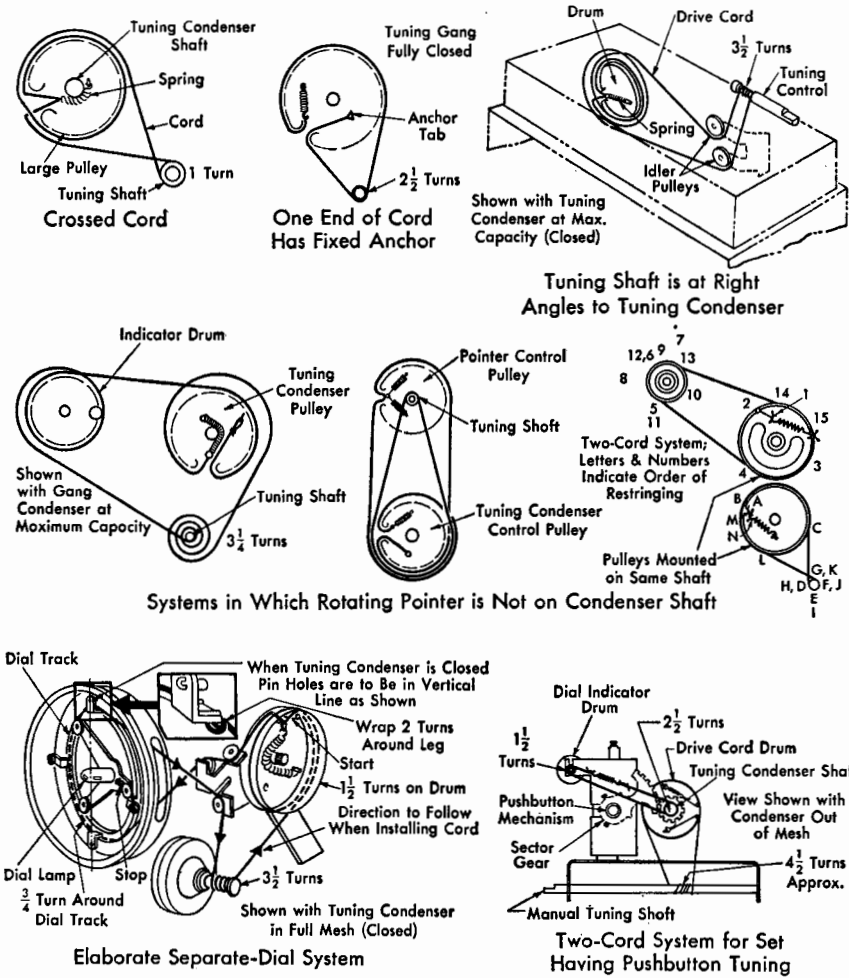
Examples of dial-cord drives for rotating-dial or rotating-pointer systems
